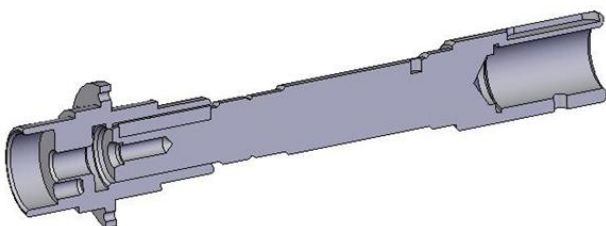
The turbine shaft – main shaft subassembly in longitudinal section.
